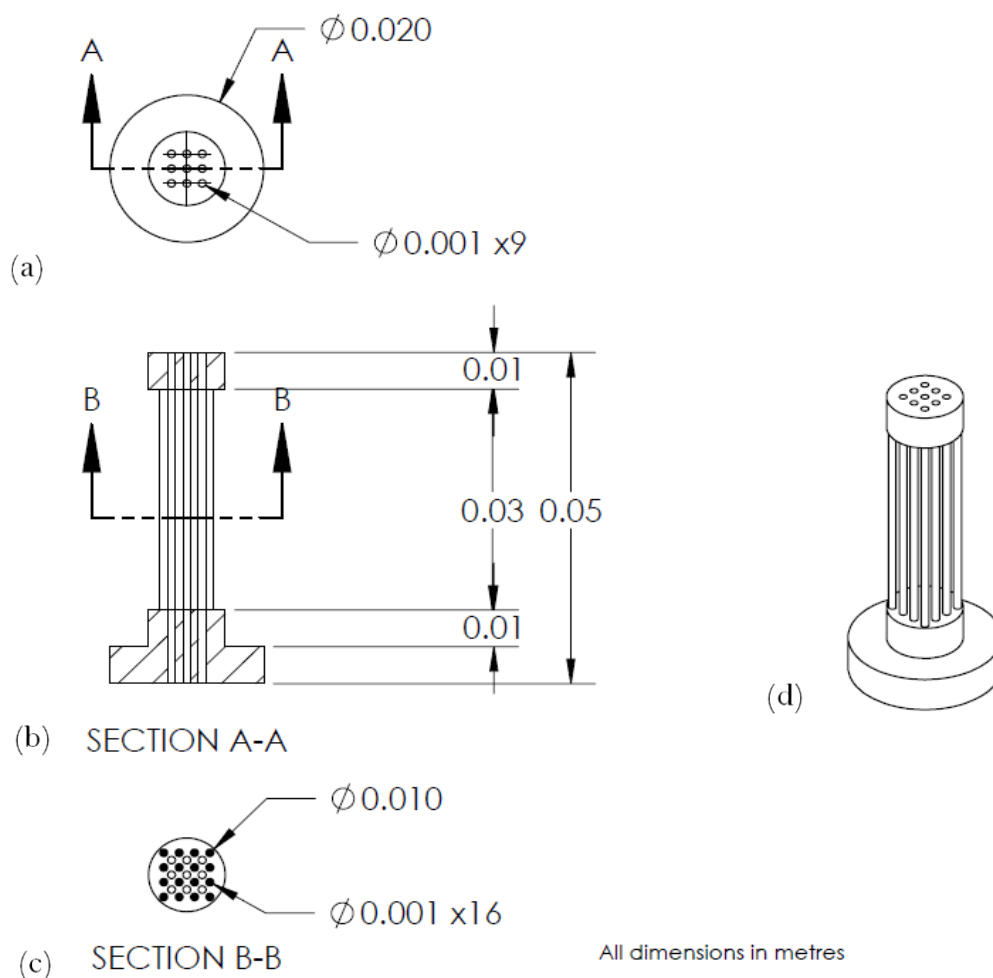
Sketch of monolithic column negative template; (a) plan view, (b) section A-A, (c) section B-B, (d) isometric view
